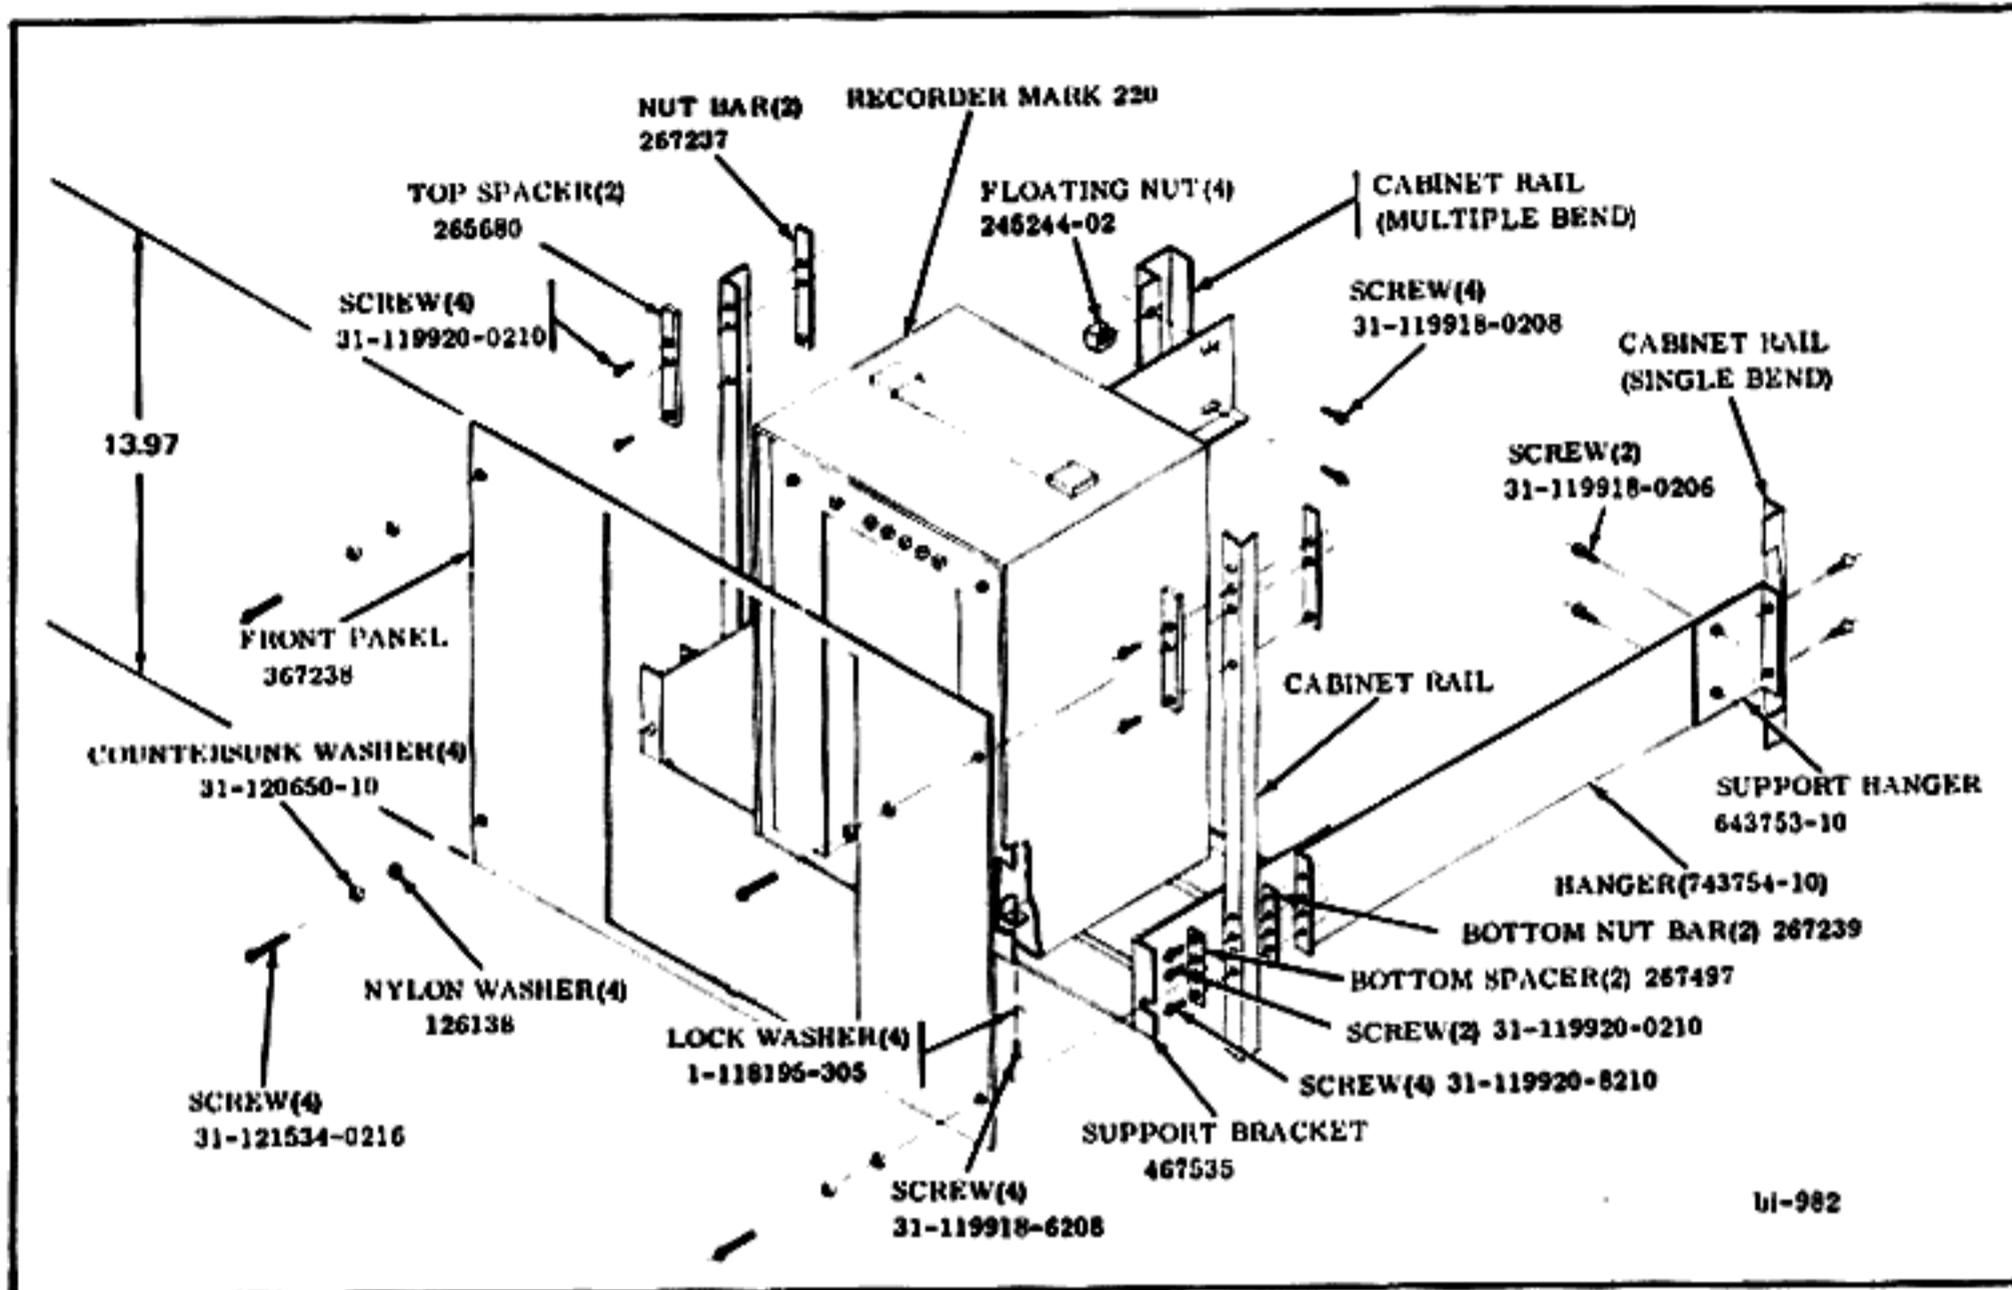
INSTALLATION OF RACK MOUNTING KIT, MODEL 11-1202-08
